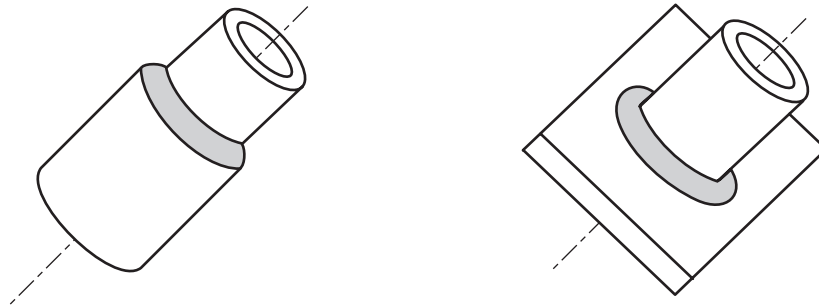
Welding Test Positions and Their Designations for Fillet Welds in Pipe
